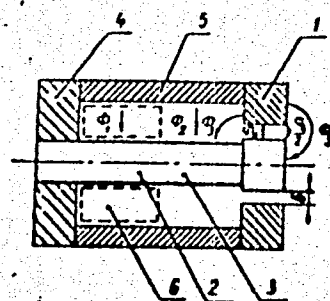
Magnetic system of low-power DC pump with a helical channel: 1 - external polar terminal; 2 - internal polar terminal; 3 - polar core; 4 - yoke; 5 - external polar core (in the form of a hollow cylinder); 6 - driving coil.
